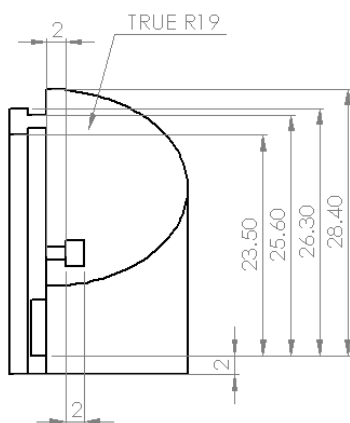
Drawings of part A of the shear compression jig assembly illustrating geometrical parameters used in the study. Dimensions in mm.
